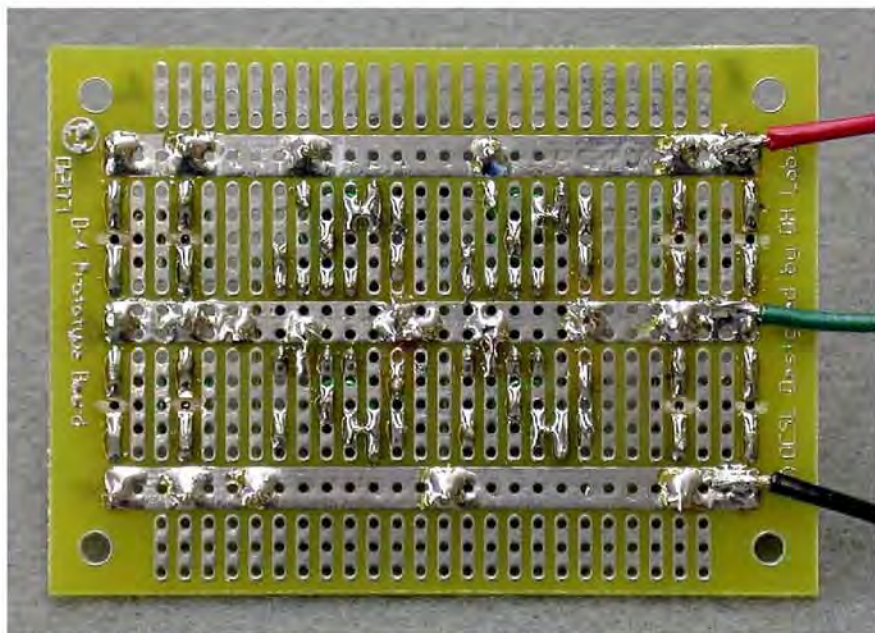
Bottom view of the THAT 1646 balanced line driver board. All parts fit on the component side of the board.
